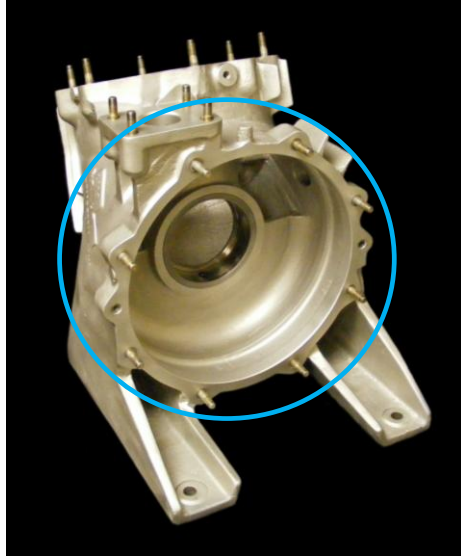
H-64 intermediate gearbox – front of housing contains 8 studs, 3 helicoil inserts, and steel liner in housing body.
